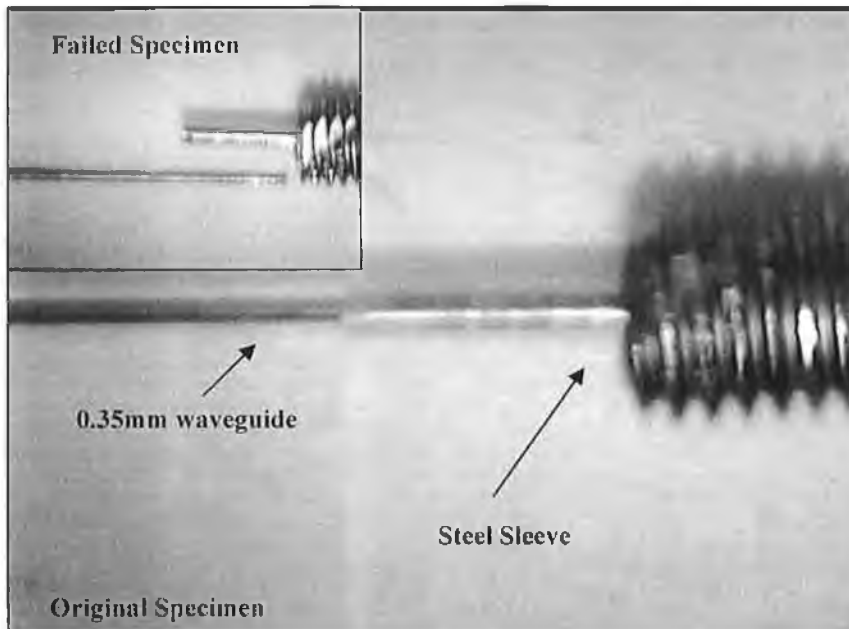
Image of 0.35mm diameter wire with axial crimped set-screw and sleeve connection method. Also shown (inset) is the failed wire.
